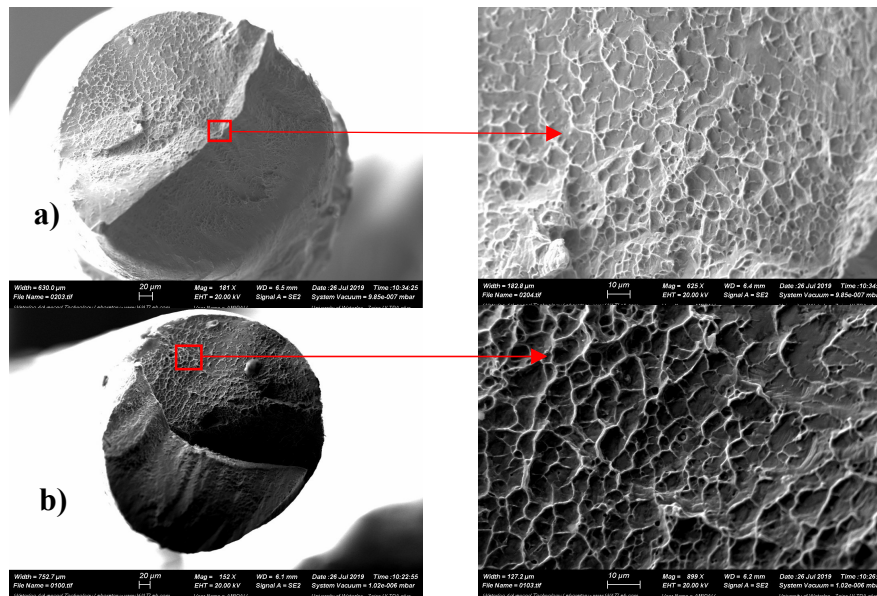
a) surface fracture on SS side; b) surface fracture on BM side
